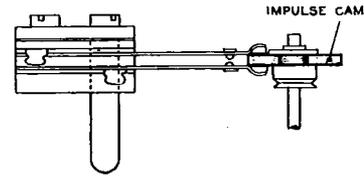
IMPULSE SPRING ASSEMBLY.
